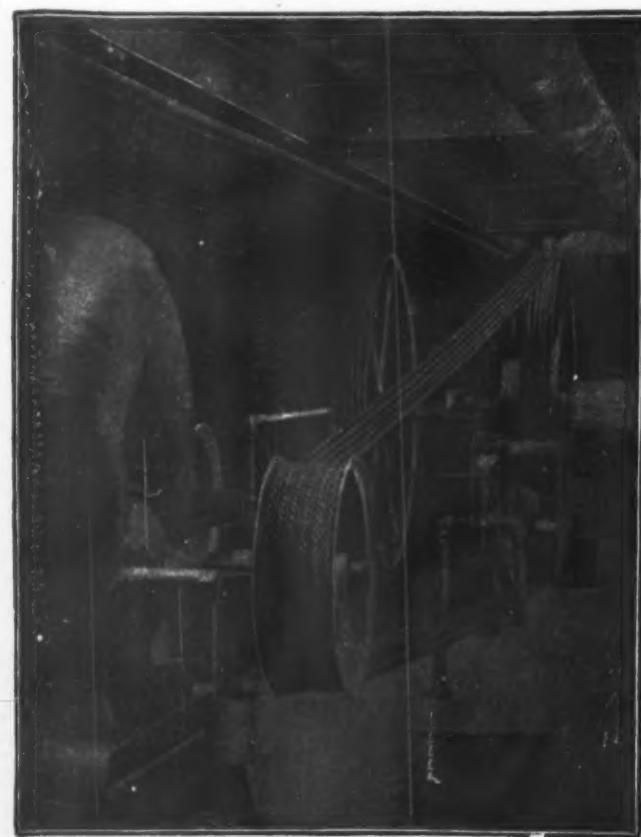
TENSION CARRIAGE SHEAVE IN DYNAMO DRIVE.
